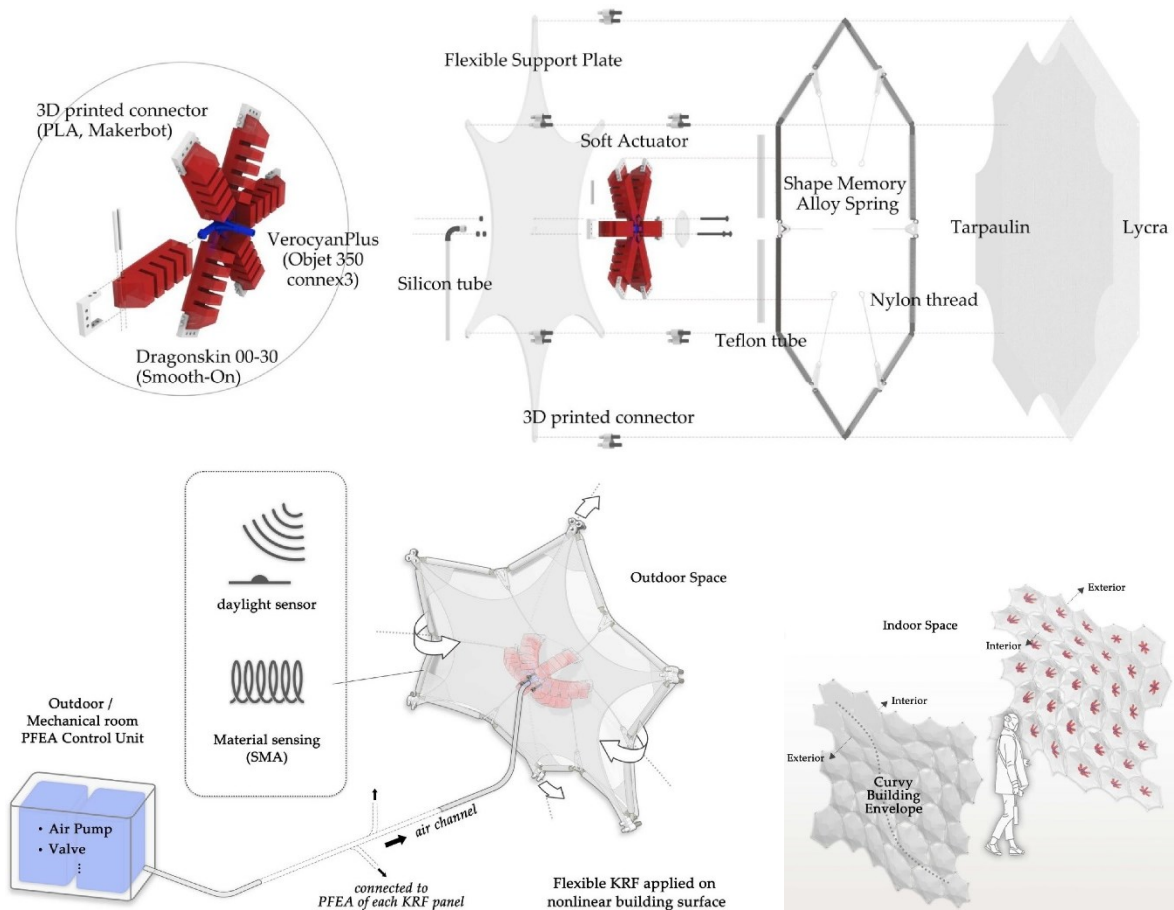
Parts assembly and system operation scheme of hybrid soft robot actuator with fabric membrane (Kim et al., 2023)
